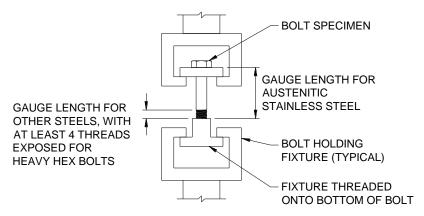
Drawing Showing Bolt Proof Loading Test Setup
